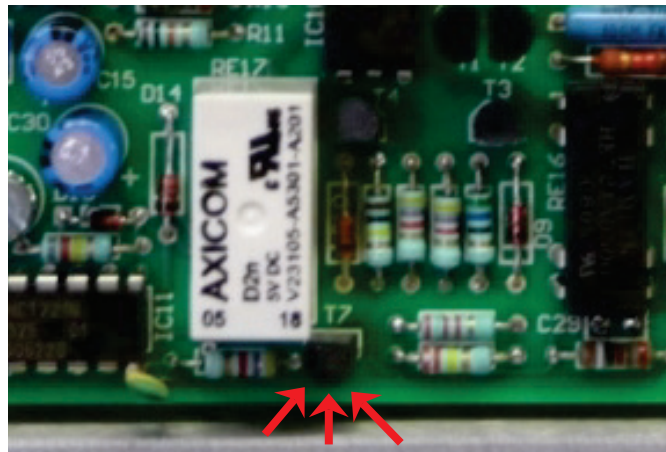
Cut out the transistor from the PCB if the type is a BC547B
